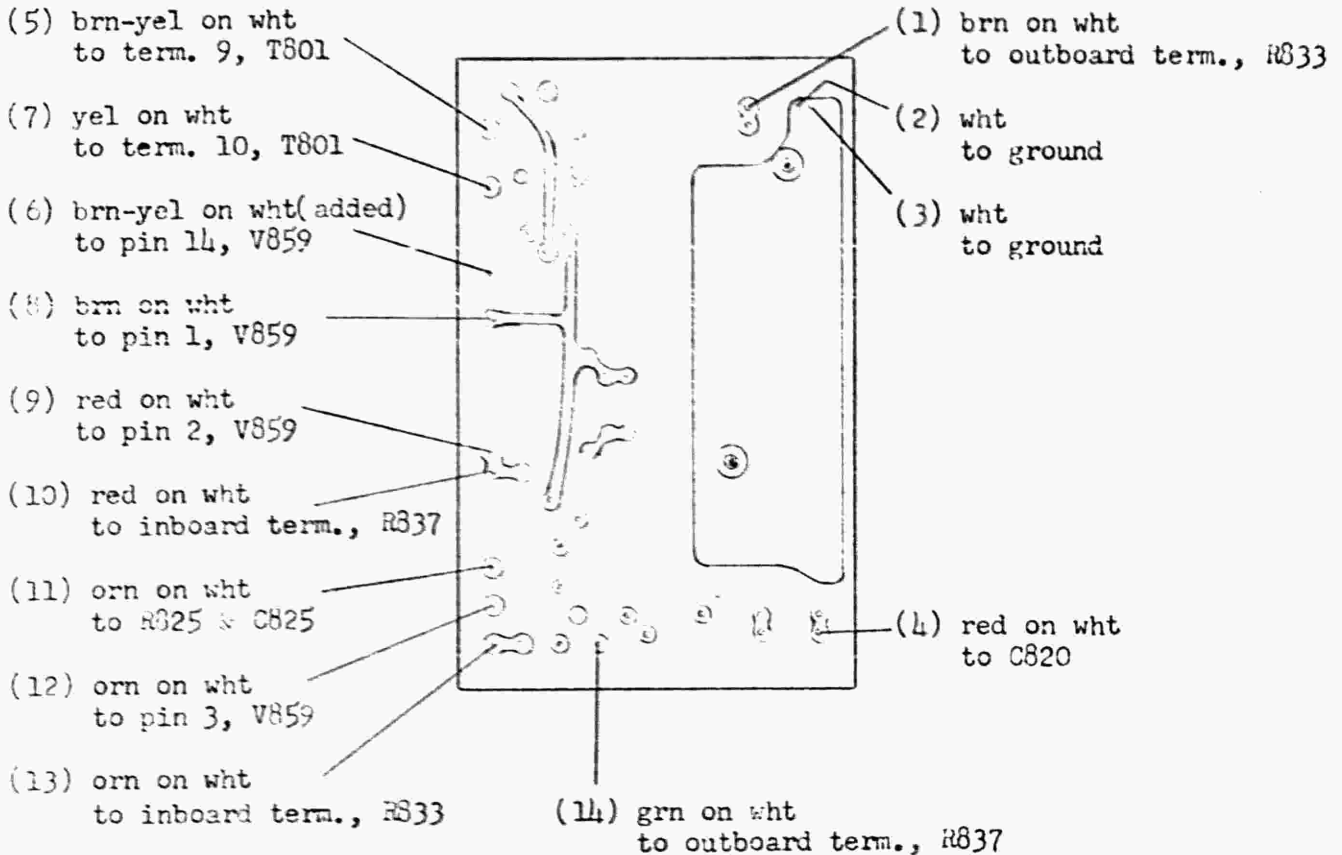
NEW ASSEMBLY, PN 670-0411-01
